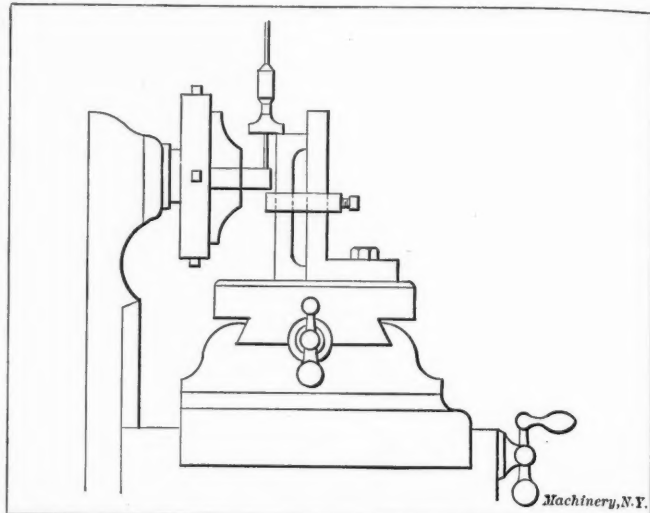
Setting Jig-plate by measuring to Turned Plug with Depth Gage
